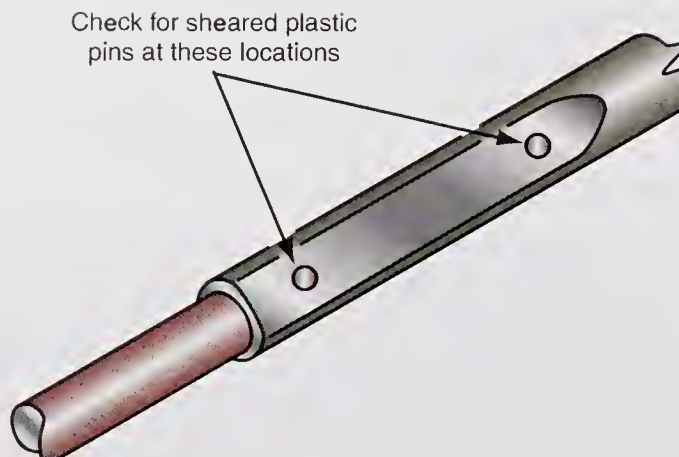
Inspecting for sheared injected plastic in steering shaft.
